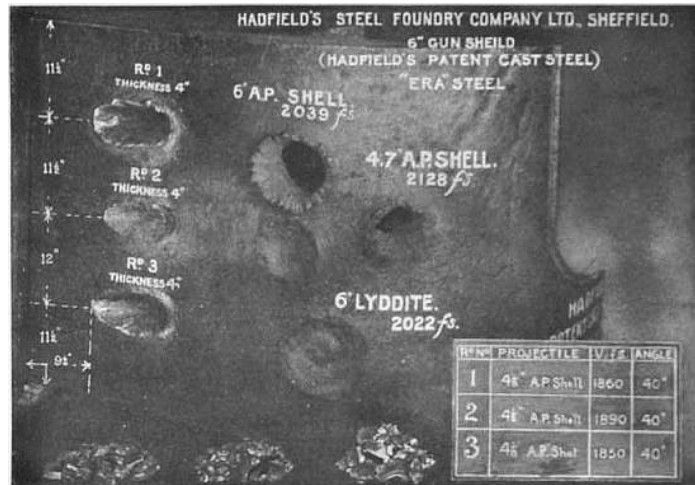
GUN SHIELD, 6 INCHES THICK, AFTER ATTACK. (HADFIELD.)
